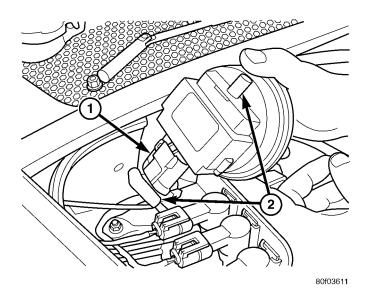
VACUUM AND ELECTRICAL CONNECTION
